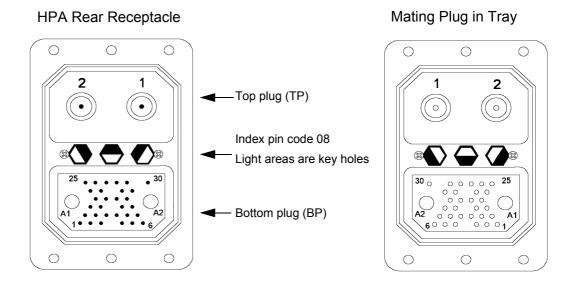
HPA Receptacle, Face View of Engaging End. Index Code is 08
